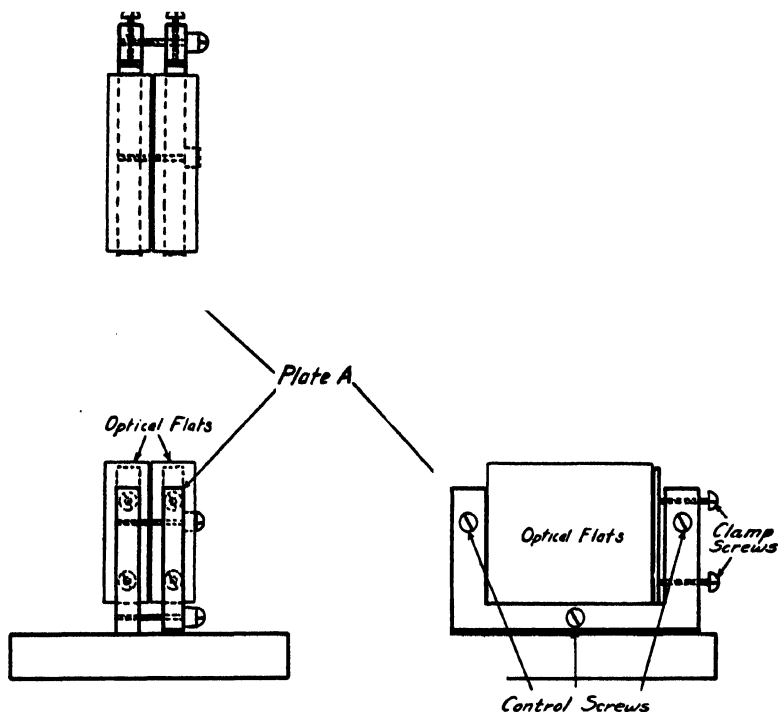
Diagrams showing the mechanical arrangement for mounting and adjusting the optical flats in the indicometer.
